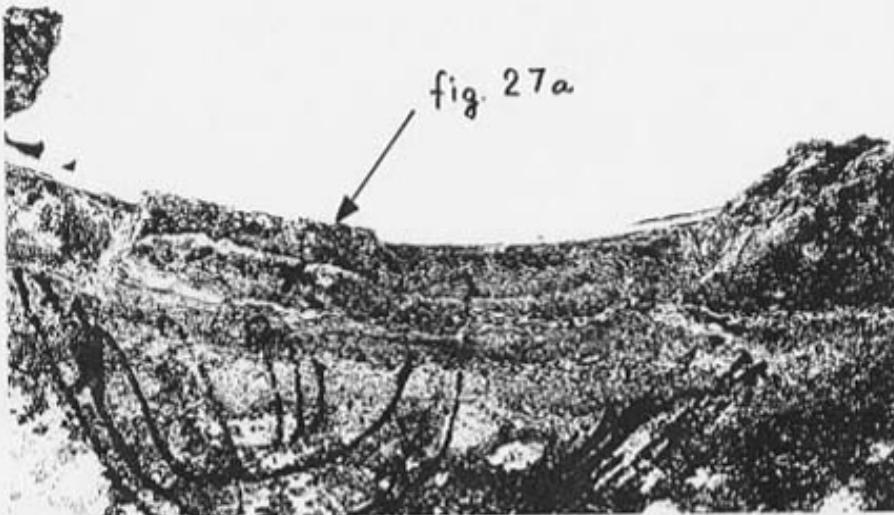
Weld cracking at bottom lock mating lug no. P3
